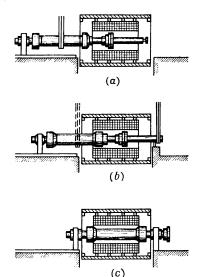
Driving the rotor into the stator with the aid of an extension shaft
